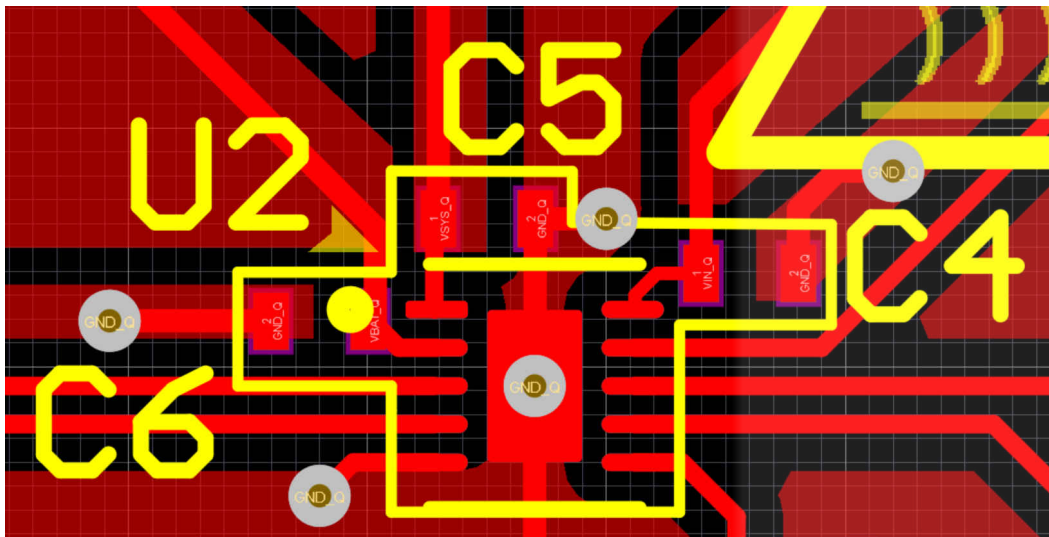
BQ25181 Fanout, 8-mils on Pads
